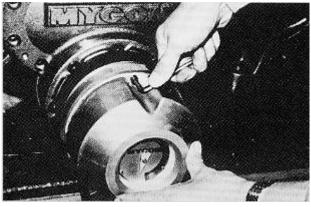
Traditional Standard type Unloader Indicator Assembly
